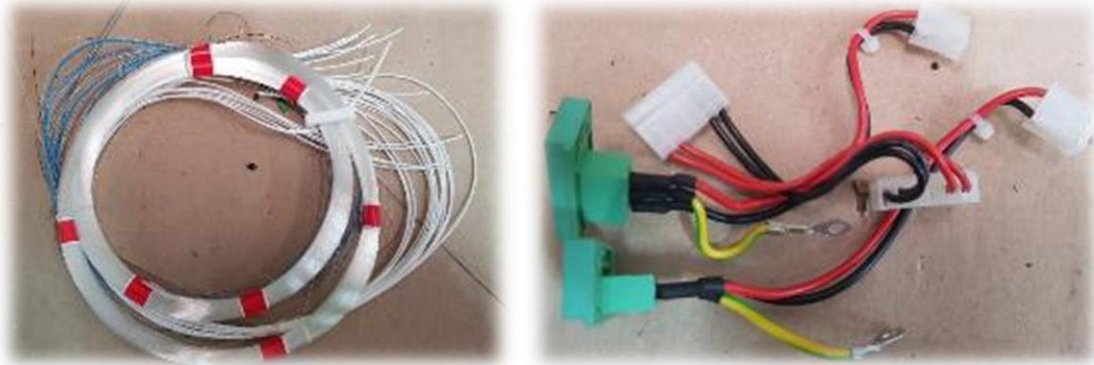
16ALM fibre (left) and copper (right) cables after disassembly.
